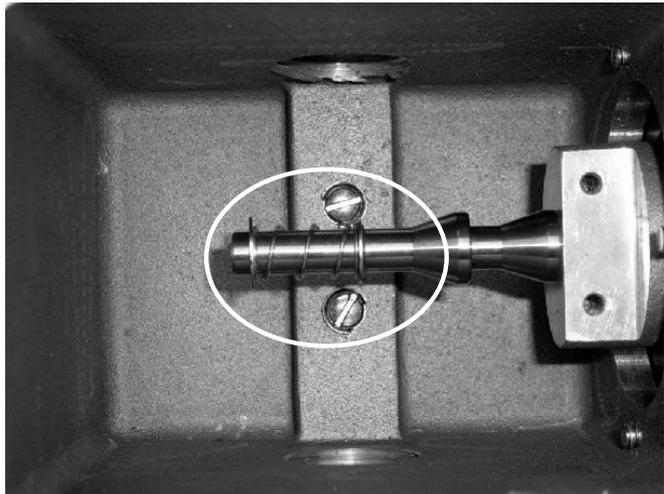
Switch assembly, spring retainer, spring with washers and machine screws with washers.
